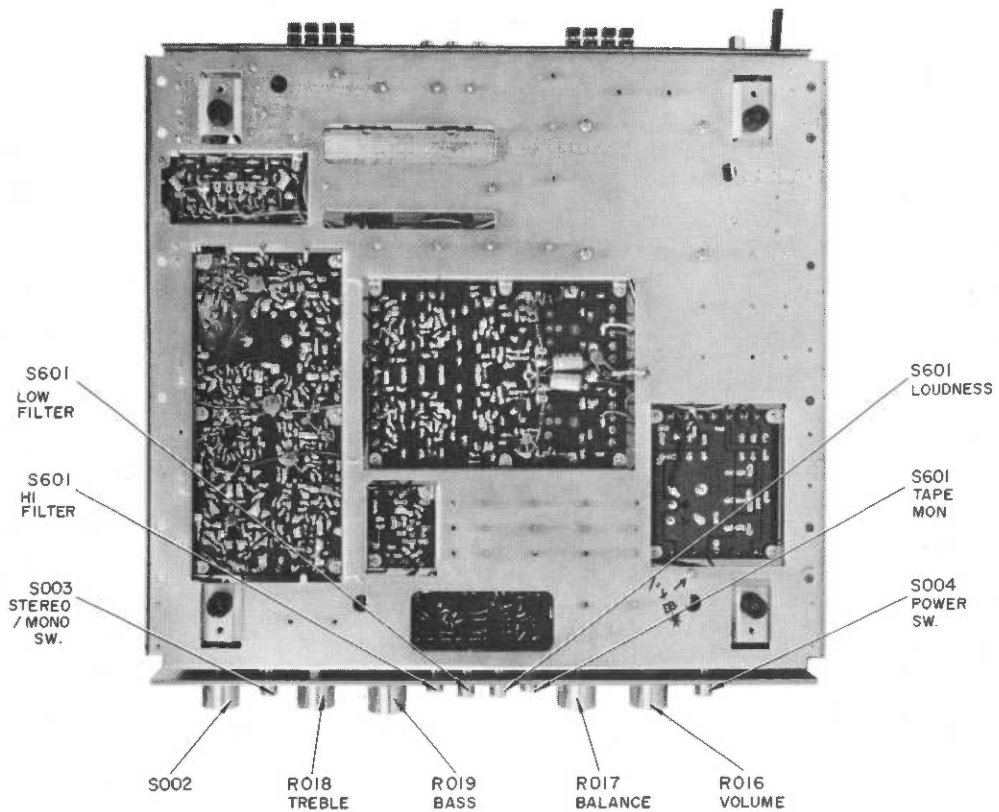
Main Chassis Adjustment and Component Locations (Bottom)
